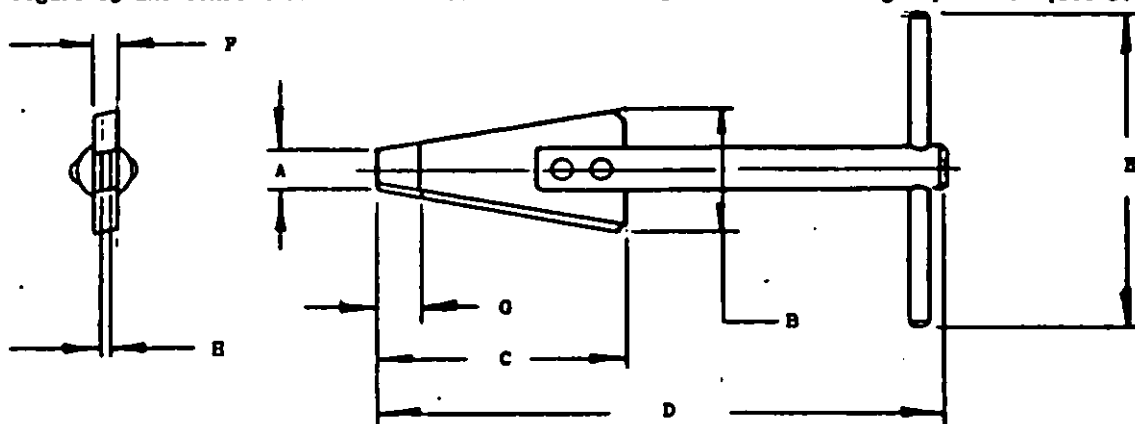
Type V, extracting tool for Unified Coarse and Fine and Spark Plug thread series.
